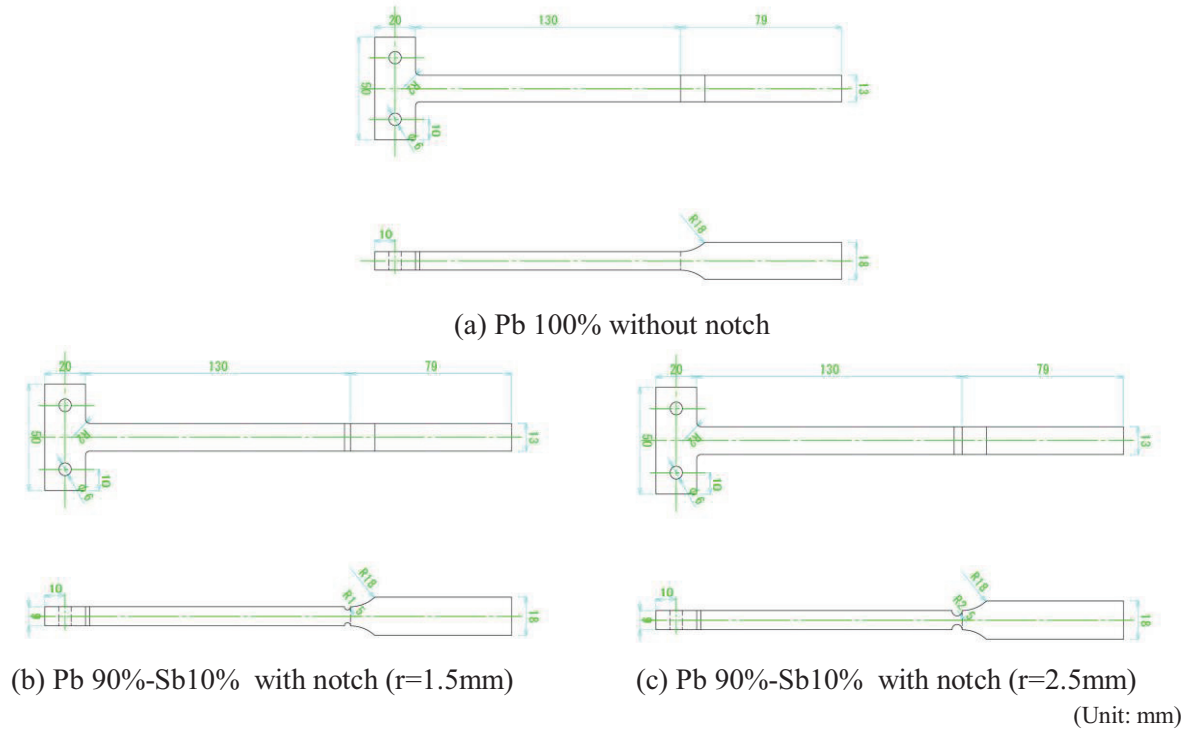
Configuration of the plate type test pieces for the fundamental plate tests
